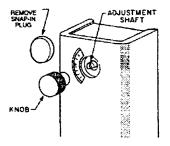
Drawing showing snap-in plug removed and the knob in line to assemble. Press the knob onto the slotted shaft.
